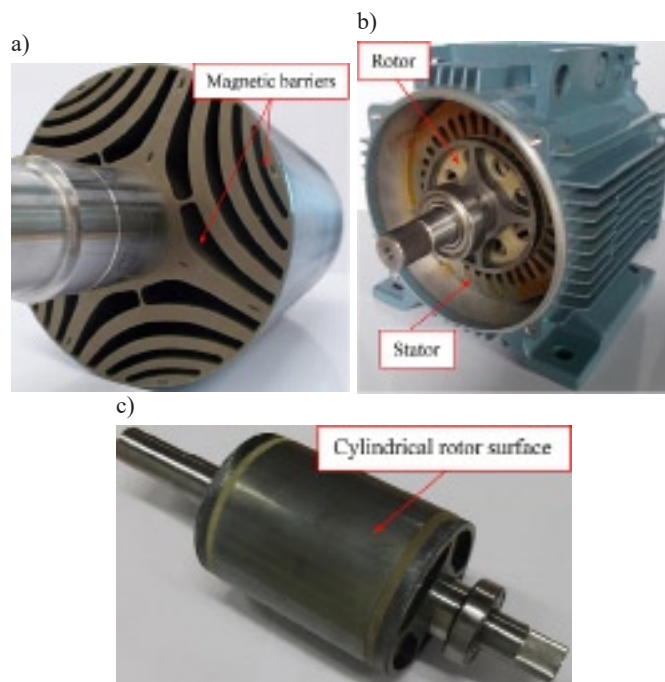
Rotor of the test motor: (a) rotor with magnetic barriers, (b) front view of the stator and rotor in the outer casing, (c) outer cylindrical rotor surface
